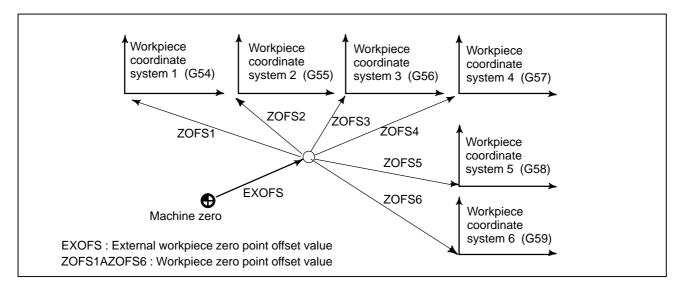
Changing an external workpiece zero point offset value or workpiece zero point offset value
